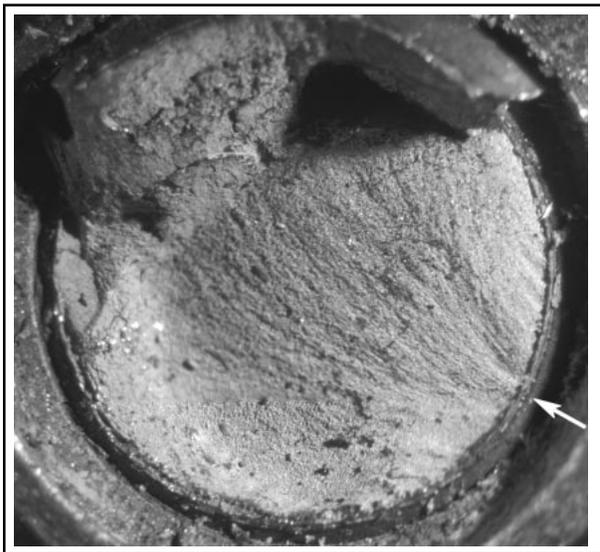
Composite stereomicroscope photograph of the left-hand bolt fracture surface inside the nut taken under oblique lighting. The fracture origin is denoted by the arrow.
